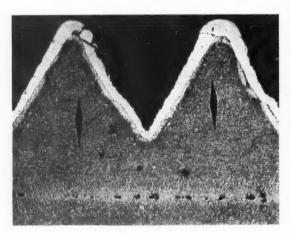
Knoop indentations on cross-sectioned threads of die shown in Fig. 6 (X150). Load, 0.3 kilogram. The white layer is nickel plate.
